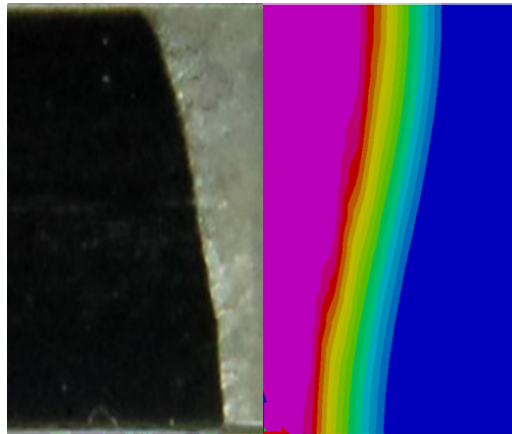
Validated hybrid laser-TIG weld macrograph
